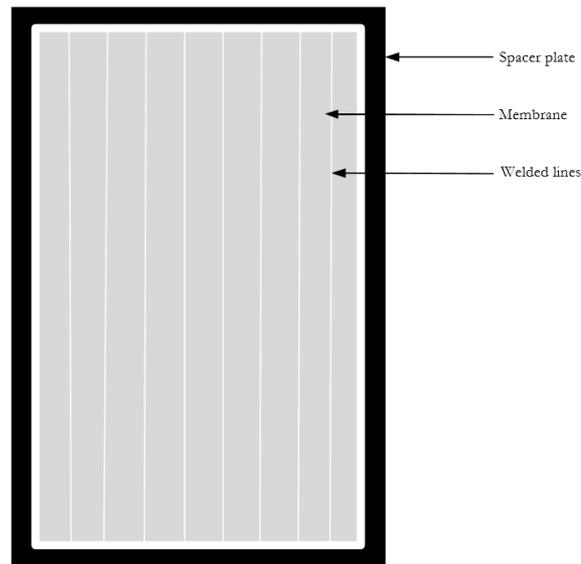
The spacer plate and PVDF membrane welded together.
